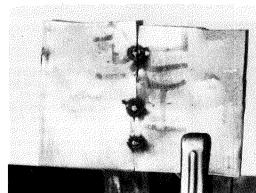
A butt weld is a bit more tricky. Tack weld the edges of the plates together first as shown here before making the final weld pass.
